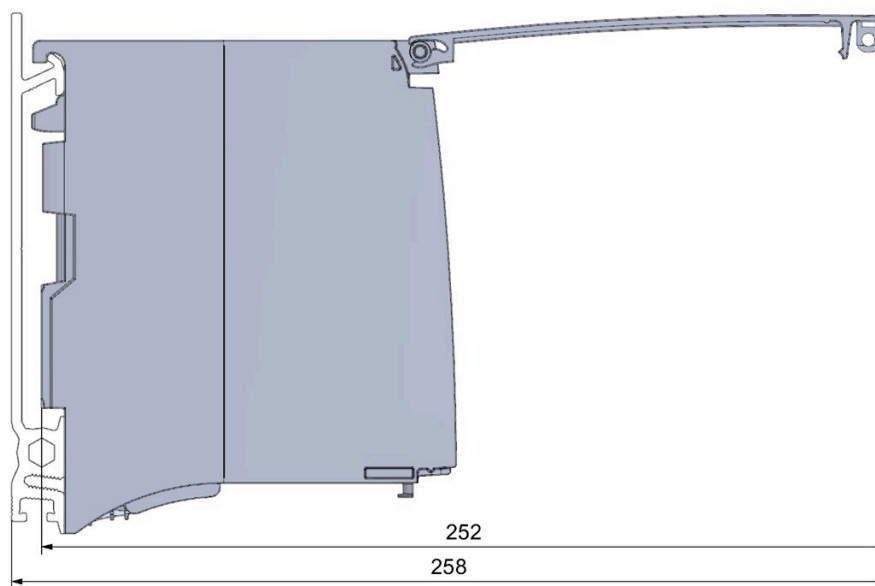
Dimension drawing of the DQ 64x24VDC/0.3A SNK BA module, side view with open front cover
